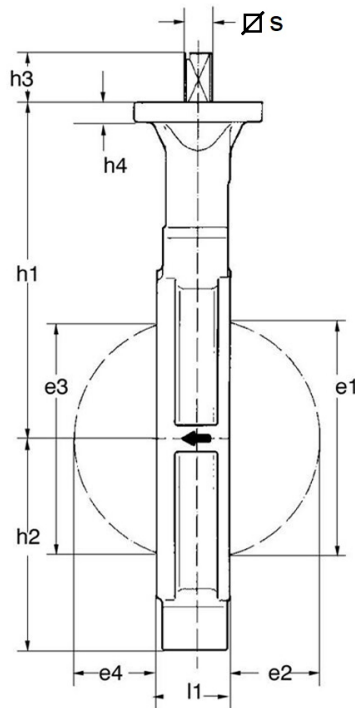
Sectional drawing of TRIODIS 150 MT - T1
